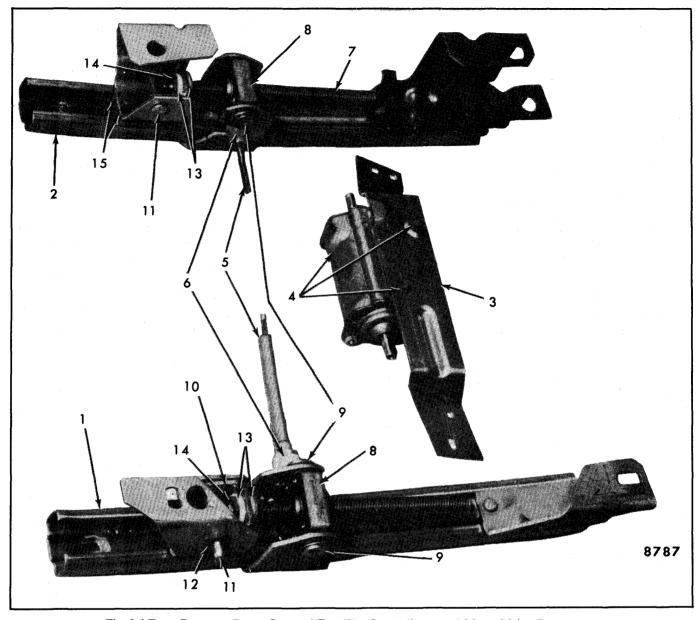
Front Passenger Power Operated Two-Way Seat Adjuster and Motor Major Components
